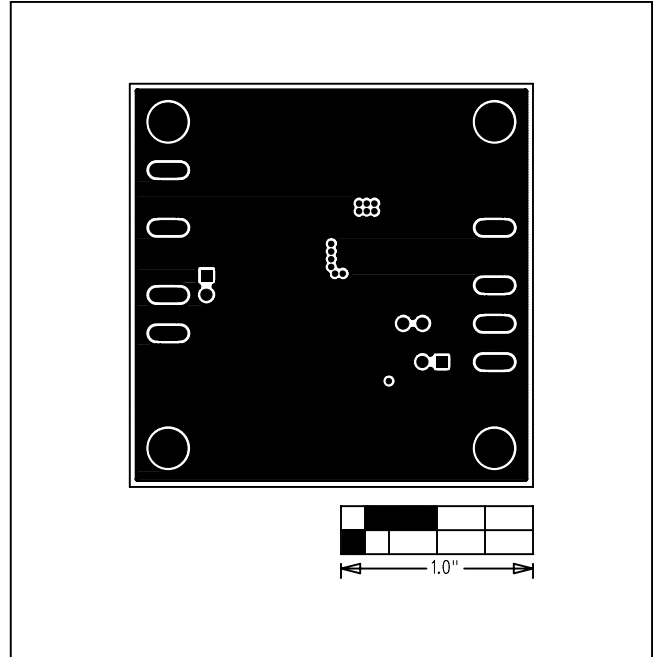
MAX17504 5V Output EV Kit PCB Layout—Inner Layer 1
